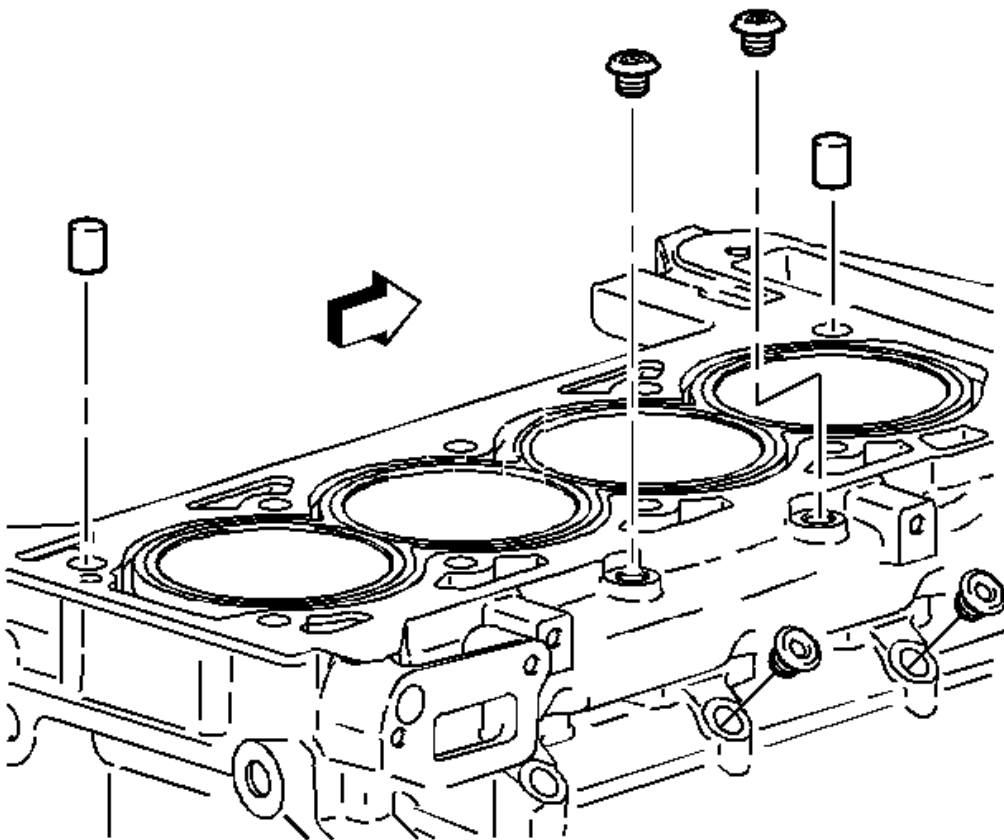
View Of Oil Passage Plug, Oil Flow Check Valve & Water Jacket Drain Plug
